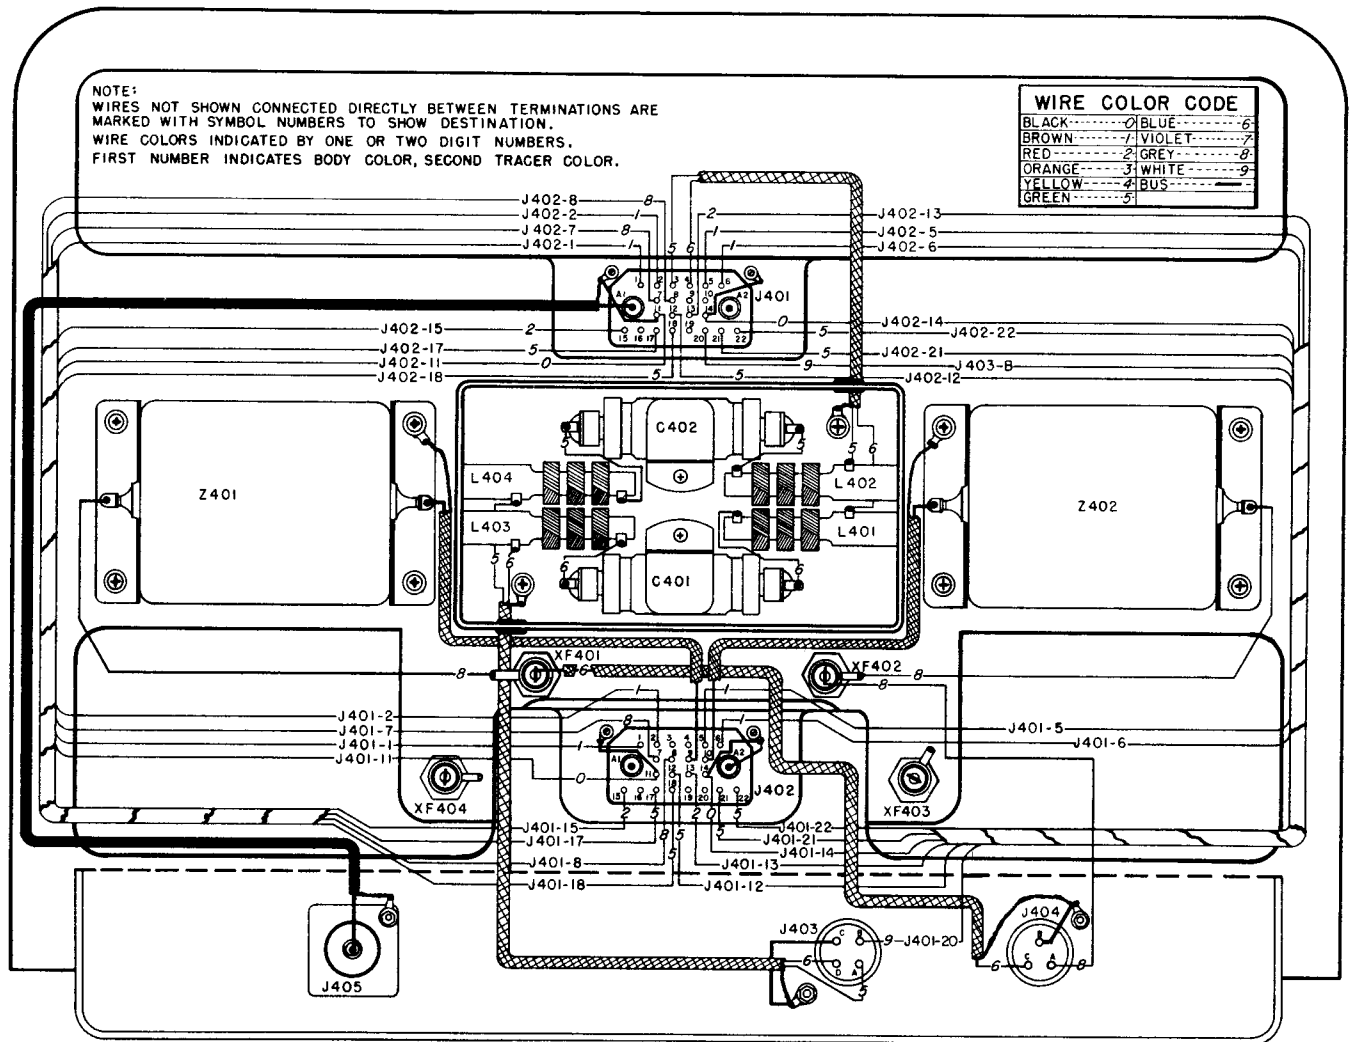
Wiring Diagram, Cable Filter Assembly
